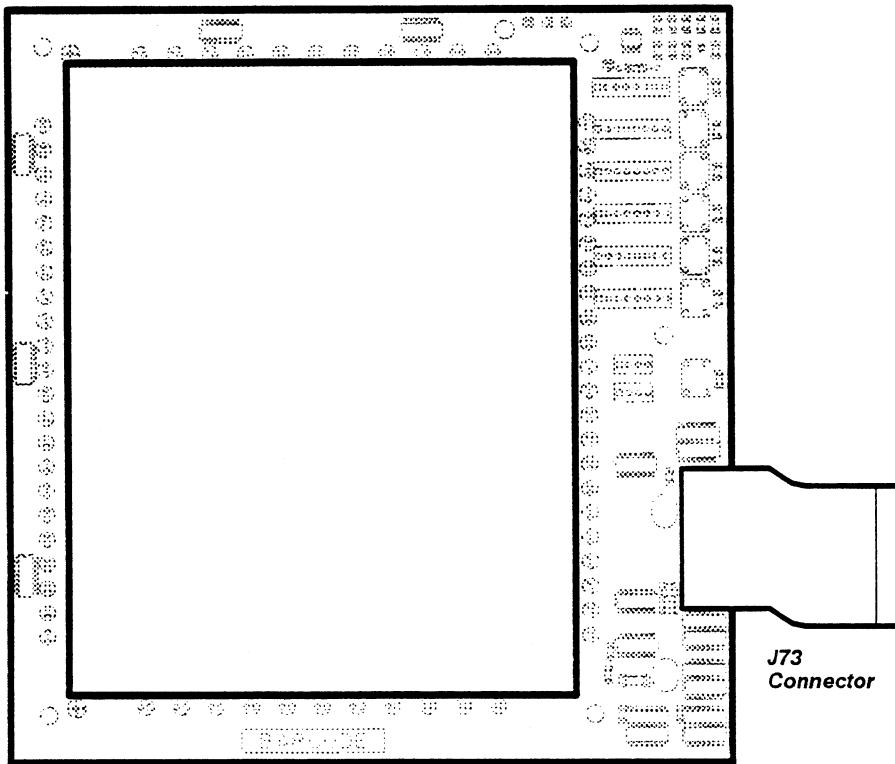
Removing/Replacing the A9 Touch Panel Assembly
